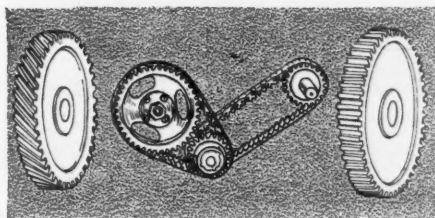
METHODS OF CAMSHAFT DRIVE
